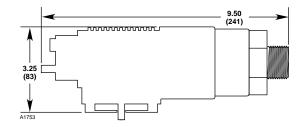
Stainless Steel PointWatch Unit Dimensions in Inches (MM)
